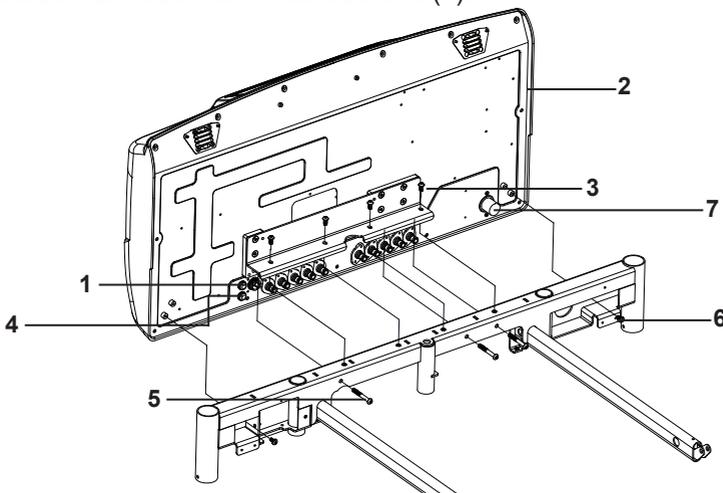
Foot extension cover plate with air hoses and electrical connections
